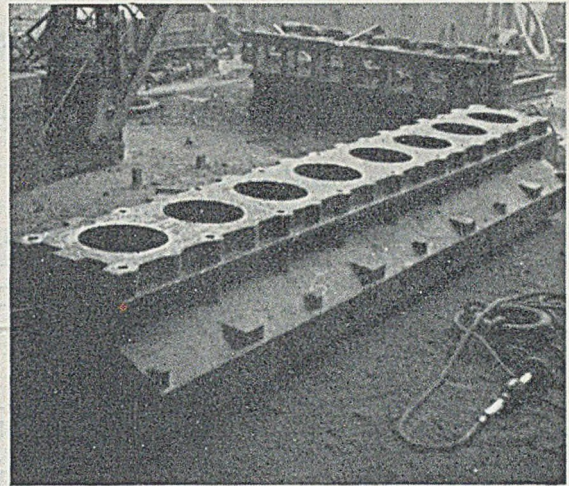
Finished Eight-cylinder Cylinder-block Casting.
